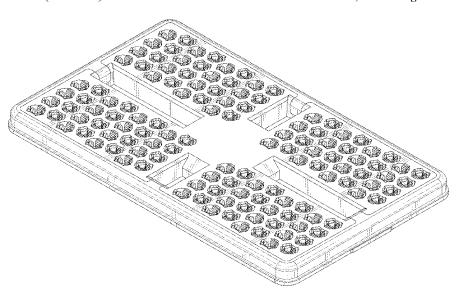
is a perspective view showing a rear, bottom and left side thereof:
